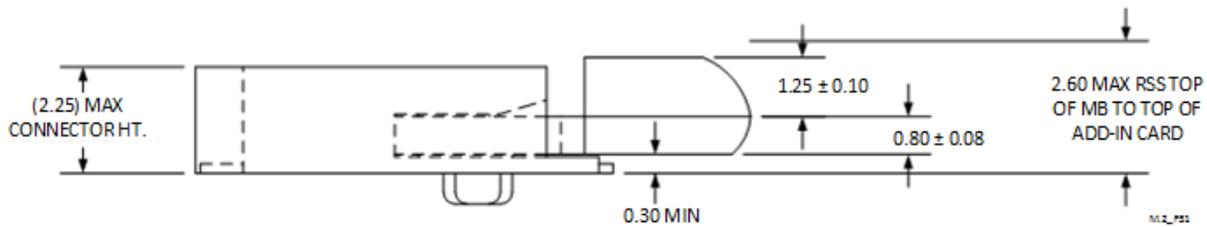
H2.3-S2 – Stack-up Top Mount Single-sided Add-in Card for 1.35 Maximum Component Height
